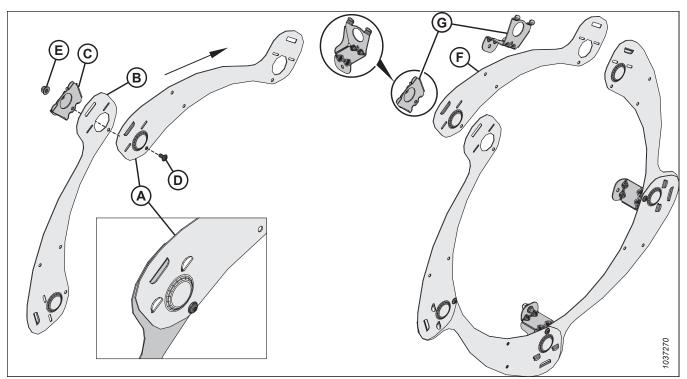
Five-Bat Reel - Initial Endshield Assembly
